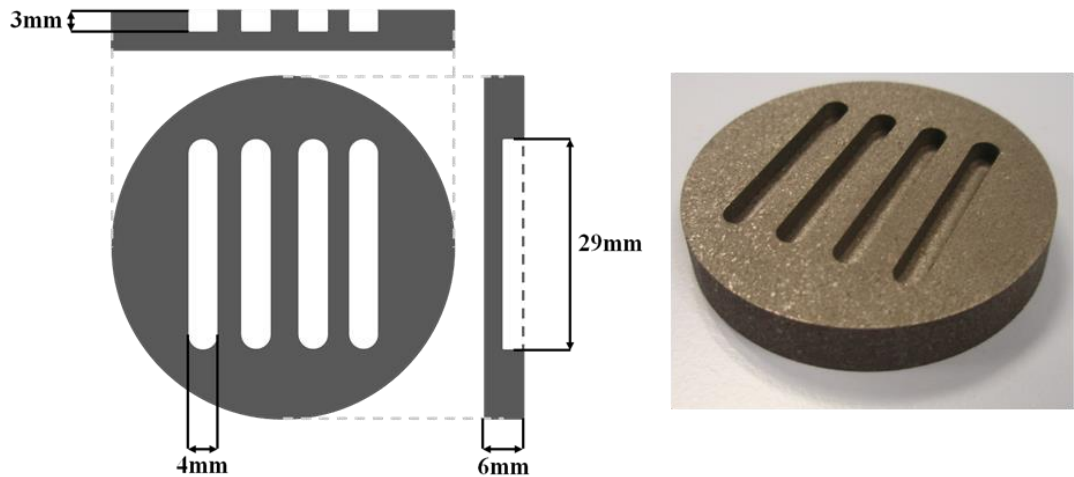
(left) schematic of the mould with dimensions marked and (right) photograph of the finished mould.
